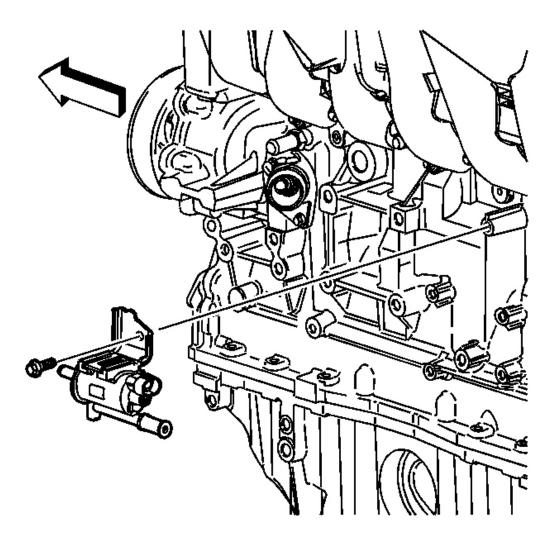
View Of EVAP Solenoid Courtesy of GENERAL MOTORS CORP.
